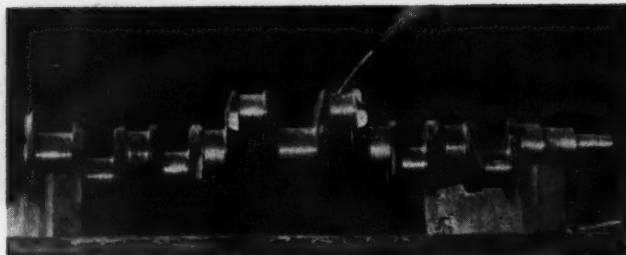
Firing Second Shot on Shaft Shown in Fig. 6. First Explosion Blew Enough of Drill From Hole to Allow Second Charge to be Inserted Directly into Oil Hole
